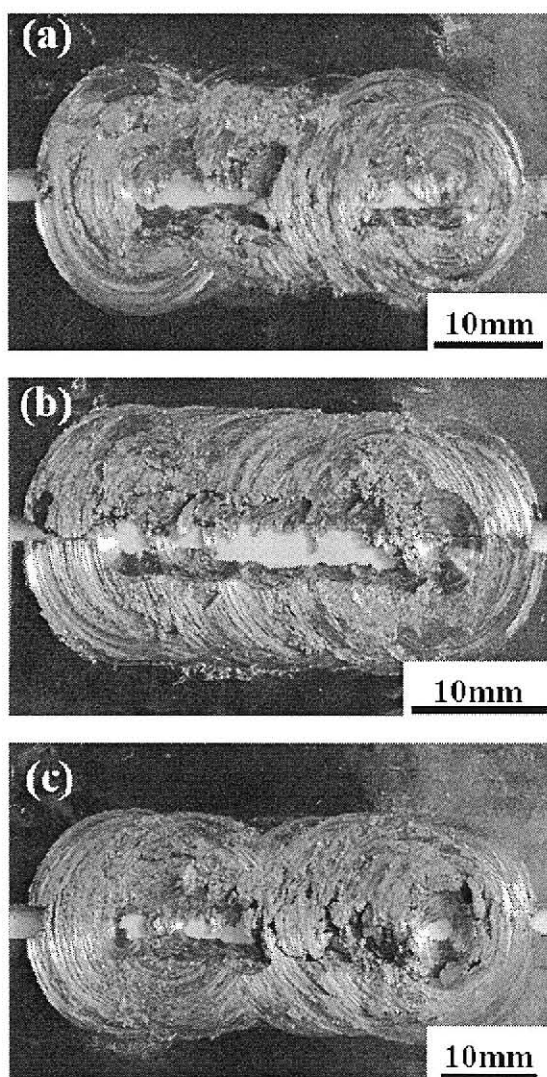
Appearance of the friction stir welded specimens: (a) 360rpm, 150mm/min,
